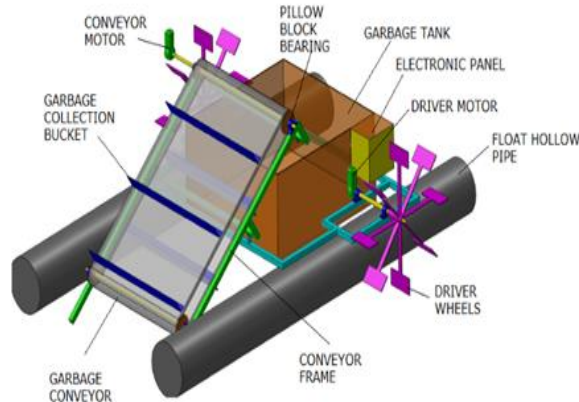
CATIA Design of Garbage Removal Machine from Water Surfaces in 3-D
